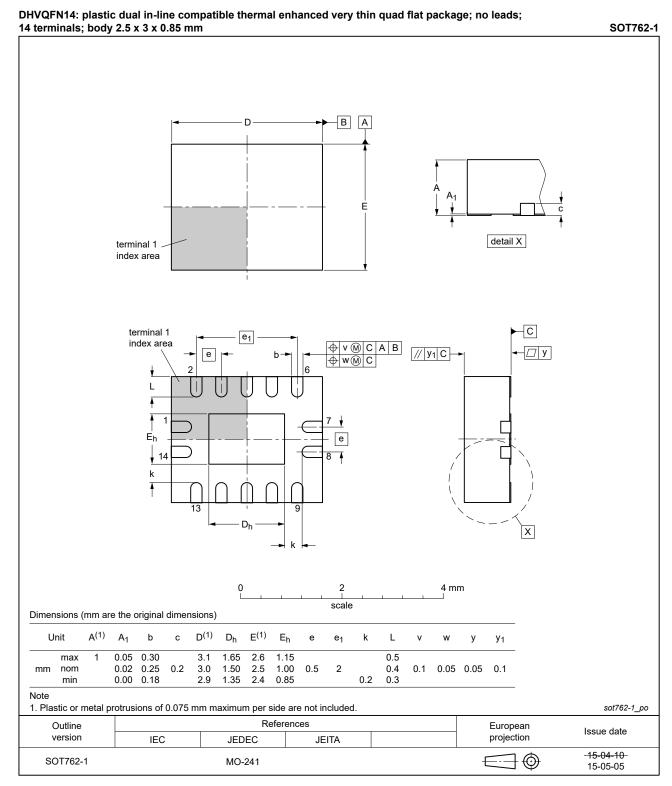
Package outline SOT762-1 (DHVQFN14)
